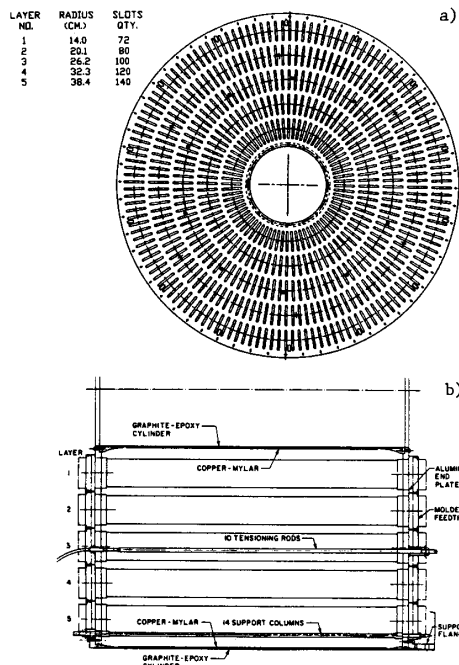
(a) Drift chamber endcap layout, (b) Side view of lower half of drift chamber.
